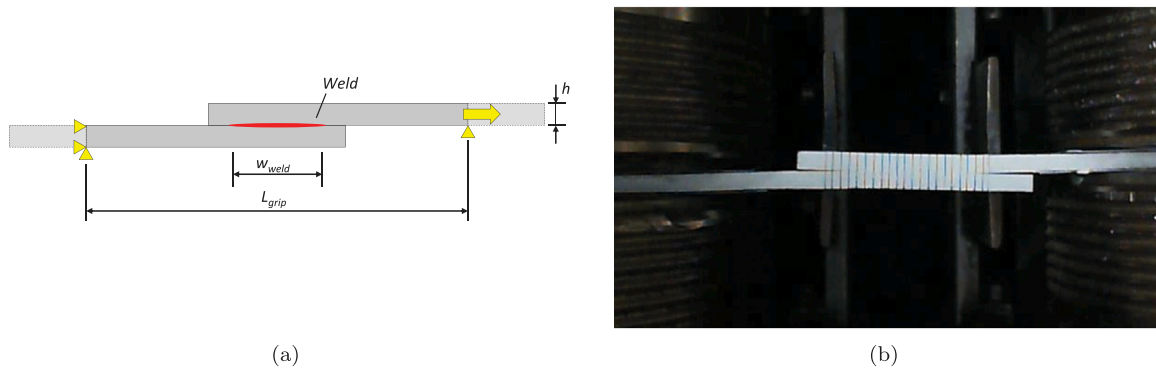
SLS tensile test at TU Delft: (a) Geometrical parameters; (b) Close-up of SLS specimen in hydraulic grips.
